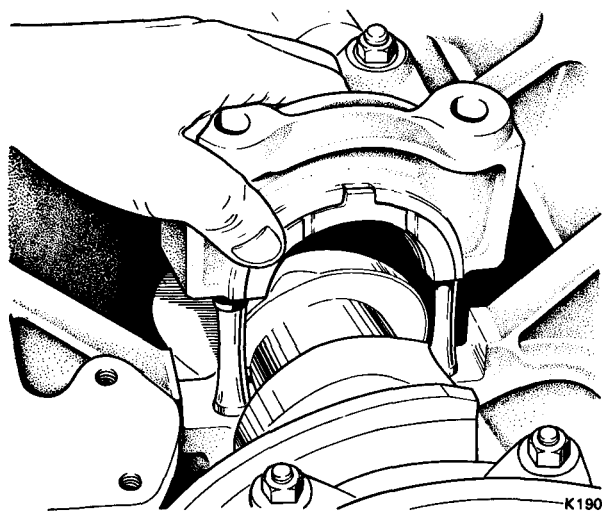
FITTING THE CENTRE MAIN BEARING CAP
